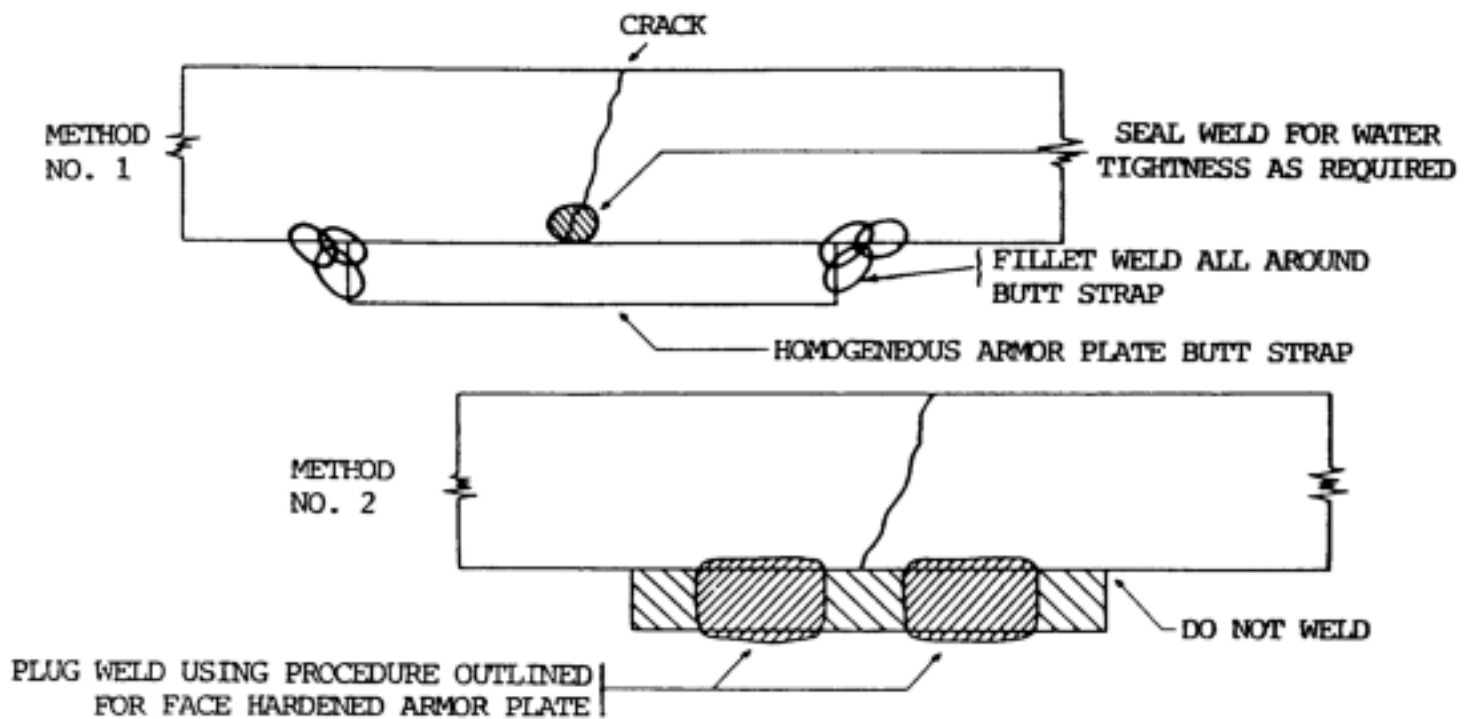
Butt strap welds on cracked armor plate.
